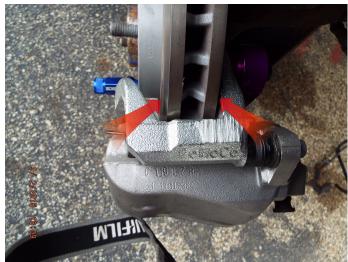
Rotor should NOT contact caliper bracket on either side.
